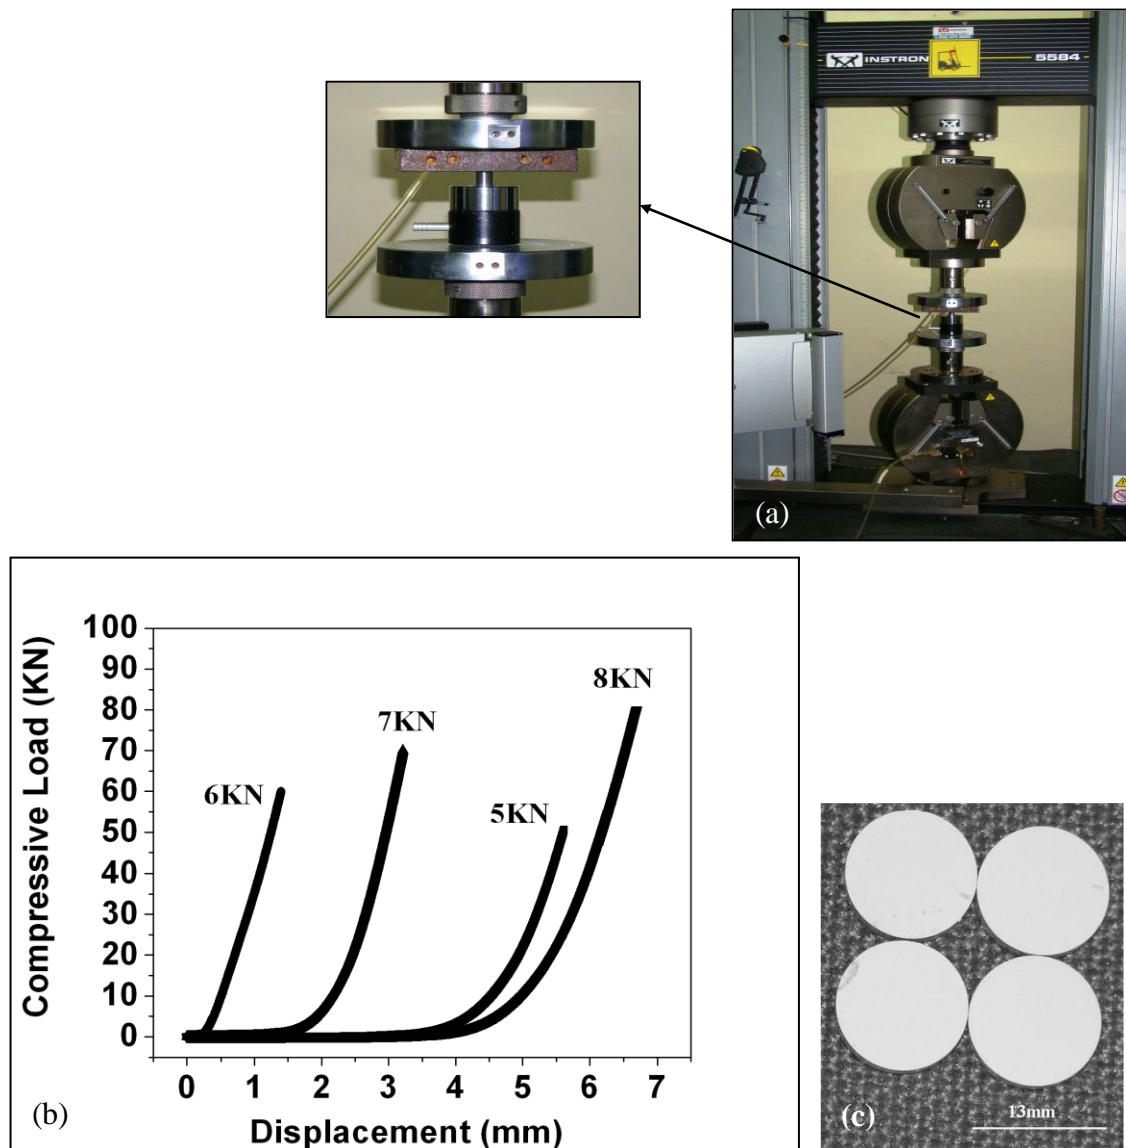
(a) Compaction Die Mounted on Universal Testing Machine (Instron Model 8812),
